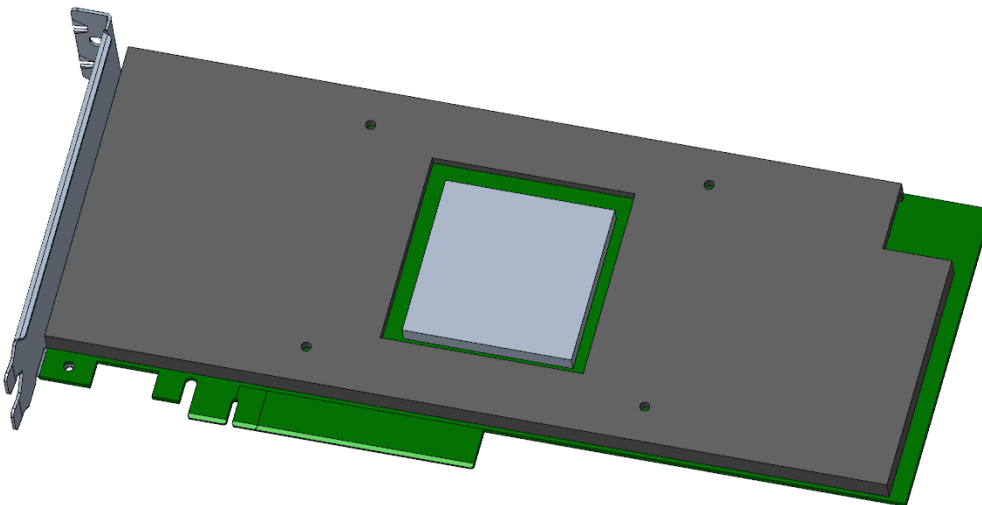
View of Example TTP with Cutout for Primary ASIC
